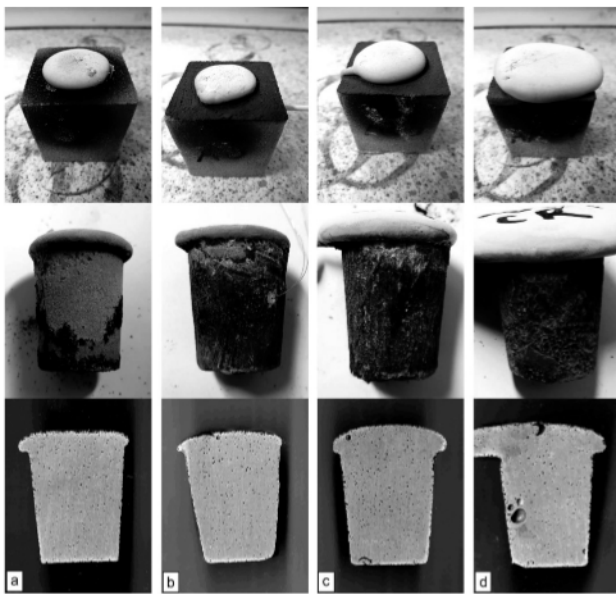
Croning moulds with castings and casting cross-sections: a) without coating, b) AG coating, c) AZG coating and d) AAGF coatingst
